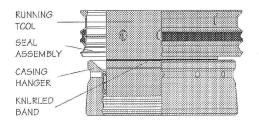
Detail of the Running Tool knurled band visible through the gap between the Seal Assembly and Casing Hanger
